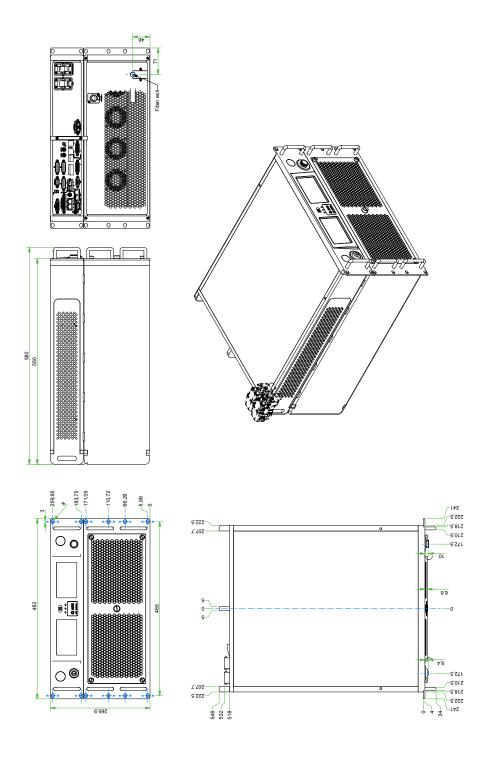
ASC-6 V41: Dimensions and mounting
